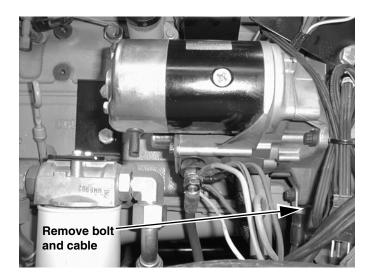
Disconnect the ground cable (from the chassis ground stud) at the starter mounting bolt (Cummins engine shown).
